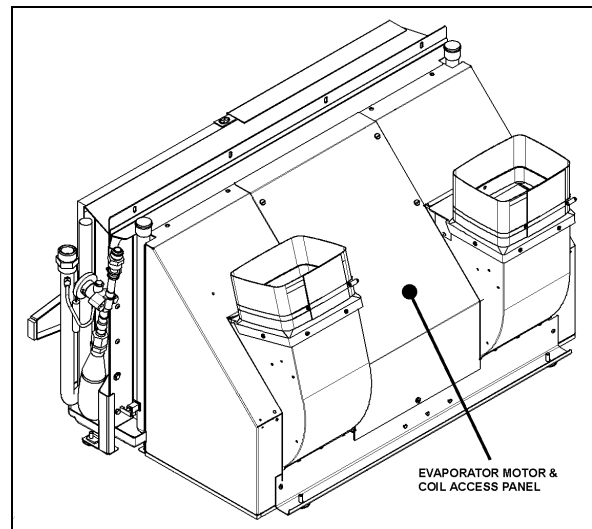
EVAPORATOR MOTOR & COIL ACCESS PANEL 22309
